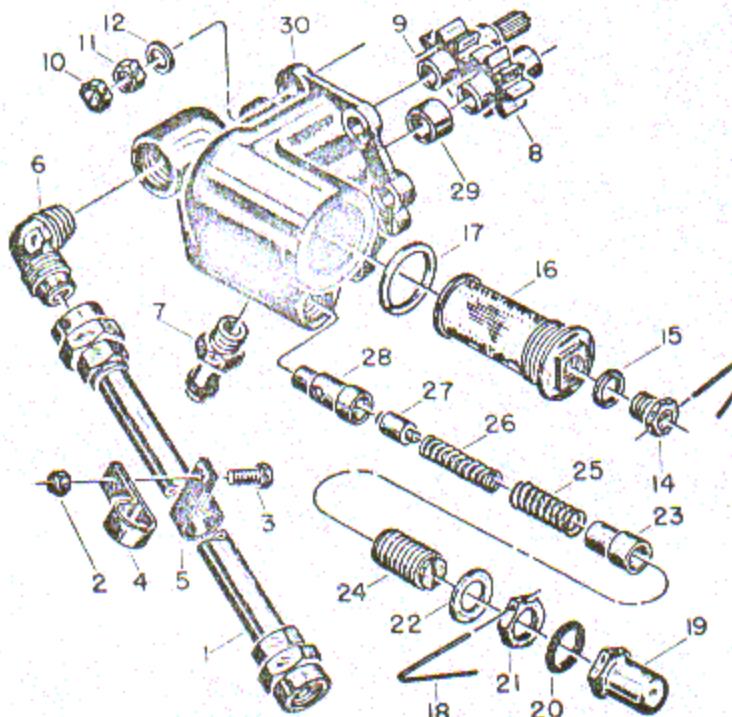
Exploded Parts View of O-470-11 Oil Pump
